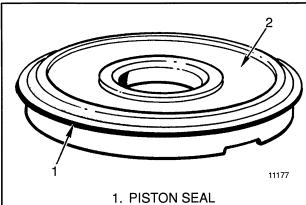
REMOVAL AND DISASSEMBLY OF CLUTCH ASSEMBLIES (2 of 2)
